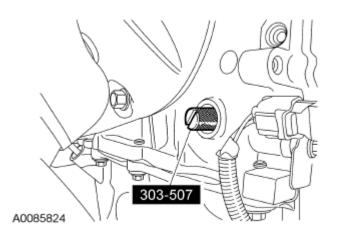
Locating Crankshaft Pulley Hole Bolt (6 mm x 18 mm) Courtesy of FORD MOTOR CO.
